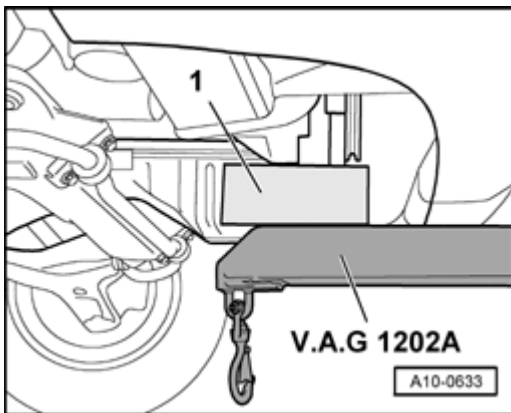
Disconnecting Coolant Hose At ATF Cooler
